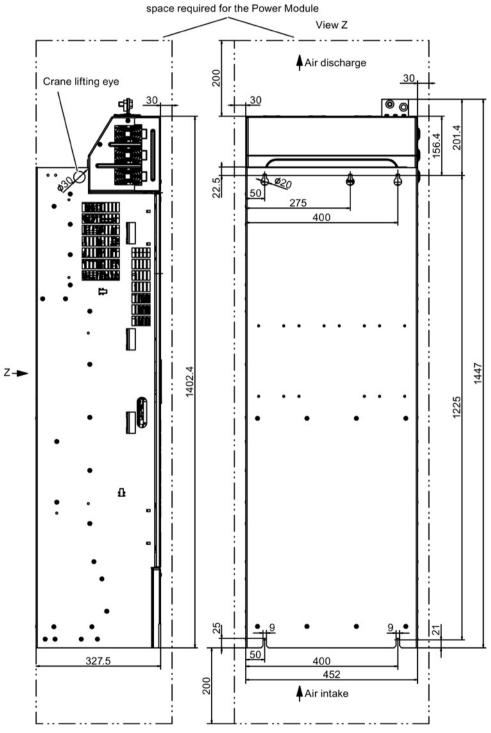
Dimension drawing of PM330 frame size GX, view from the side, view from the rear
